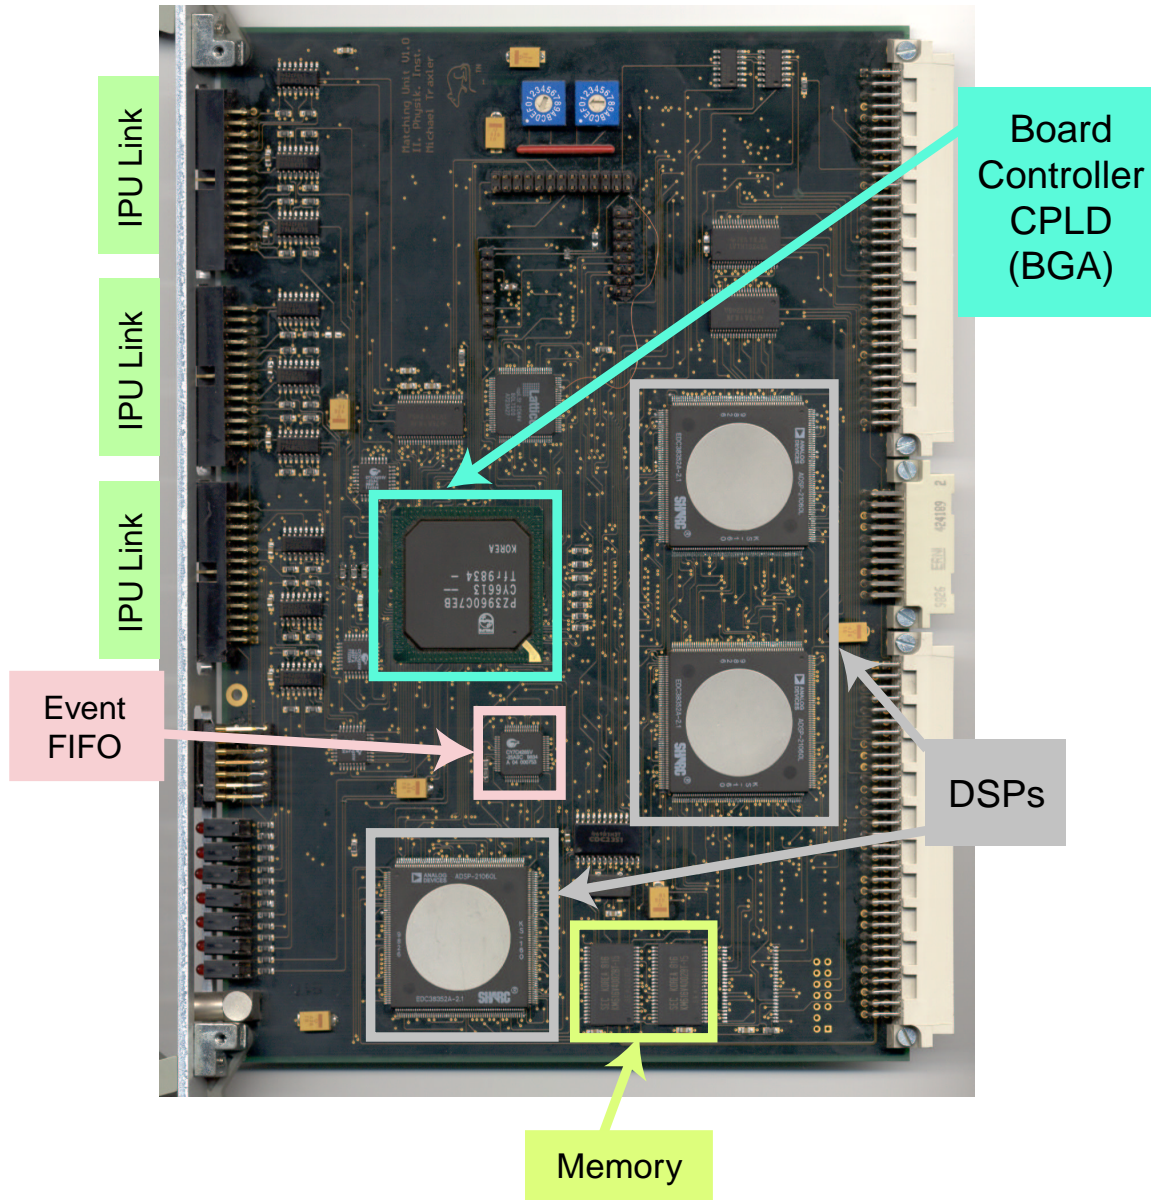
The prototype of the Matching Unit. The different functional groups on the 6 U-VME board are shown. The right side of the board provides the connectors to the VME bus. On the back side of the board the bus switches are mounted. The board controller CPLD is a Ball Grid Array with 592 balls beneath the chip.
